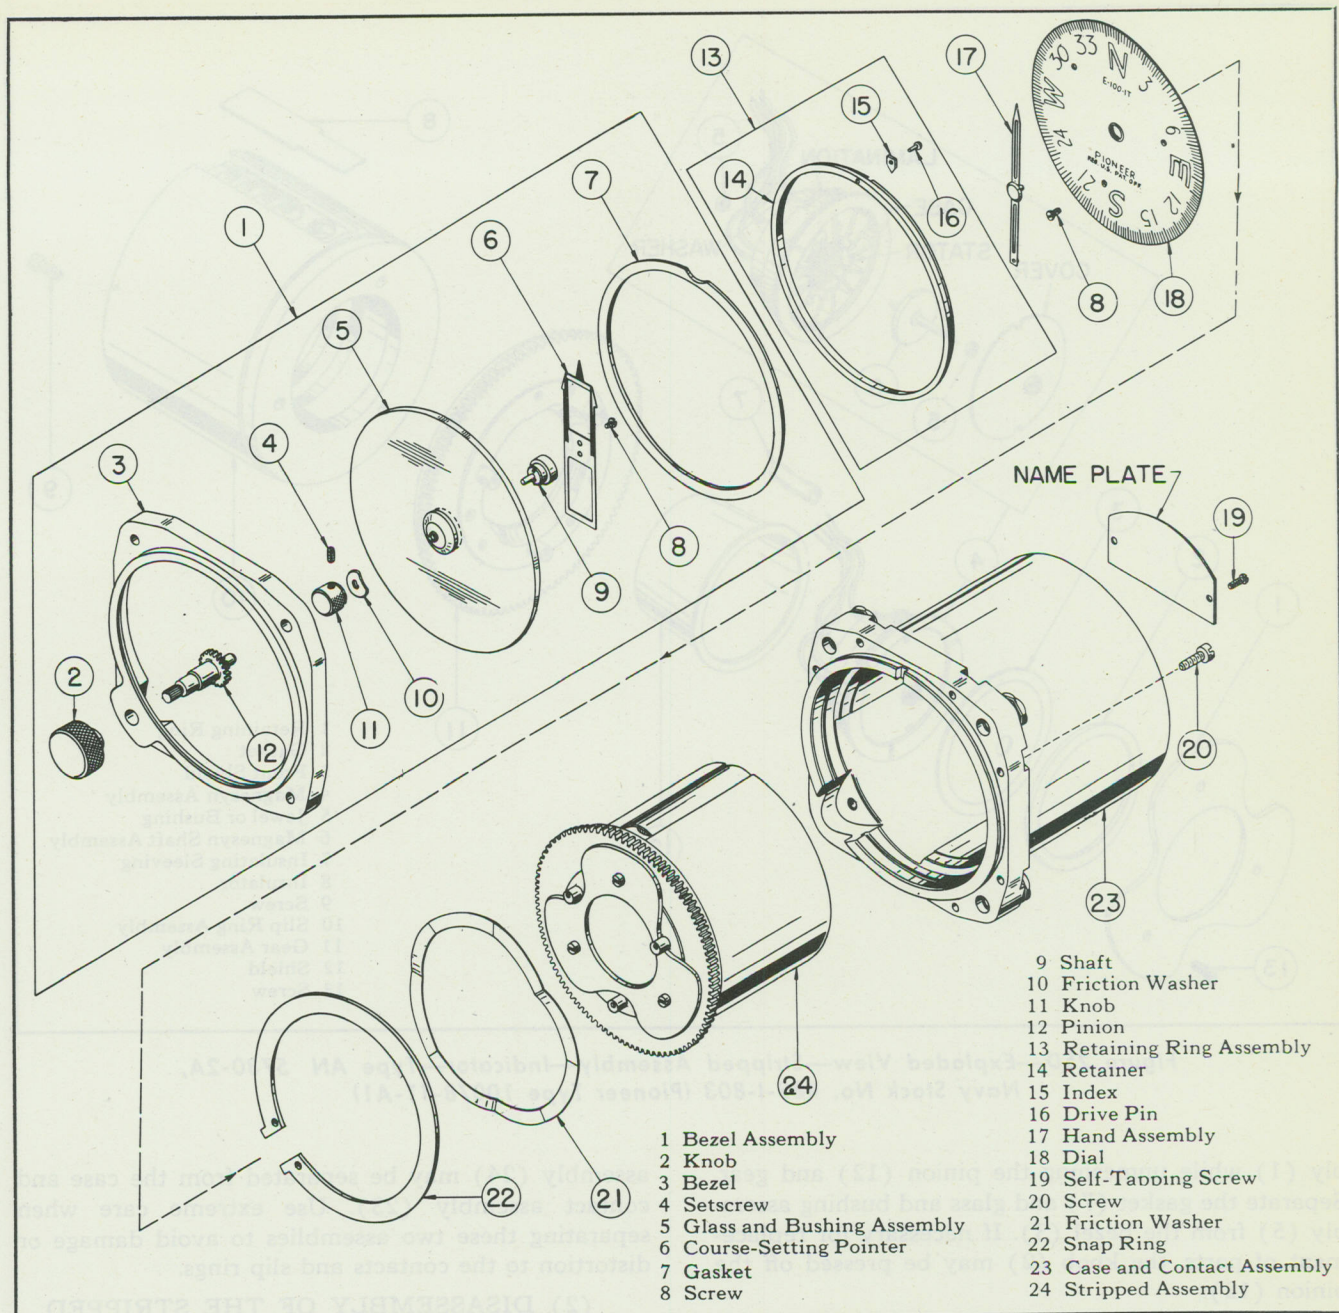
C—Exploded View—Main Assembly—Indicator—Type AN 5730-2A,
